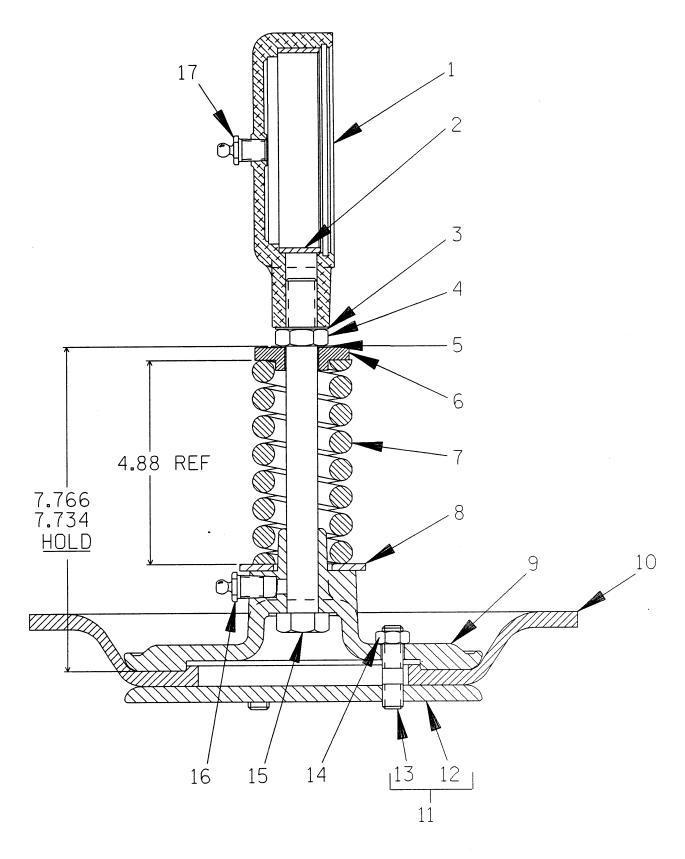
Standard 5685 And Optional 5685B Plunger Rod Assembly
